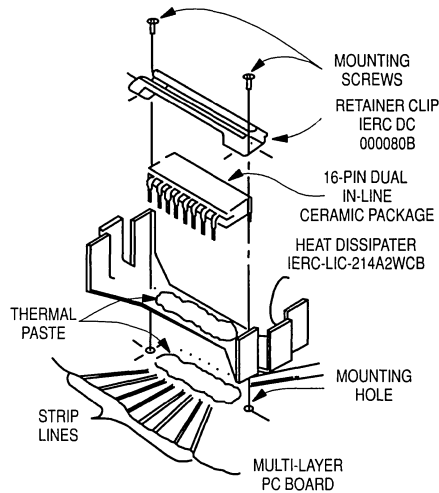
MECL High-power Dual-in-Line Package Mounting Method
